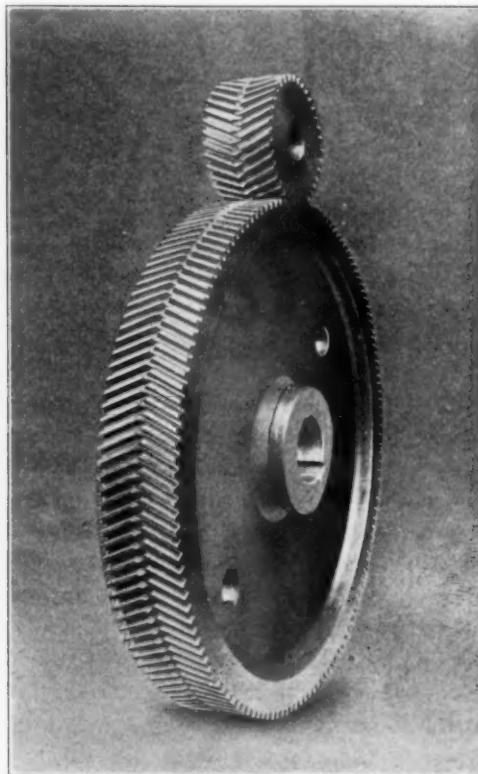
TYPICAL HERRINGBONE GEAR AND PINION
